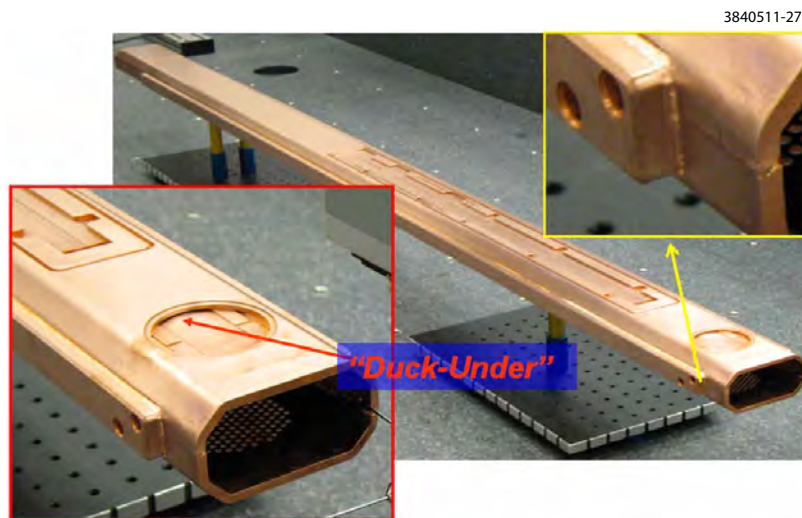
The beam pipe halves were EB-welded with approximately a 1 mm beam penetration. Two side cooling channels were also EB-welded to the beam pipes. The inserts show close-up views of the 'duck-under' channel for the RFA flexible circuit (lower right) and the EB-welds (upper left). The welded beam pipe is shown here on a CMM (coordinates measuring machine), which gave the total measured distortion of less than 0.15 mm. (Photos: courtesy of Dawn Munson of LBNL)
